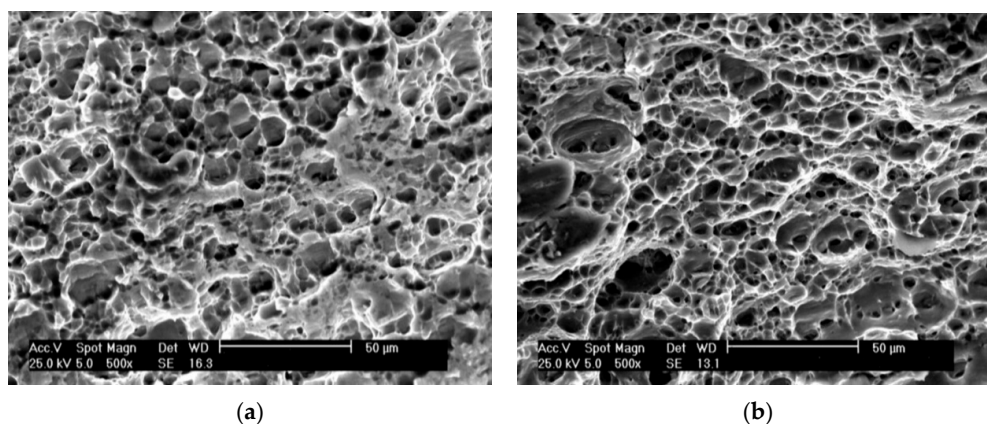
SEM pictures from fracture surfaces of (a) FS- and (b) FSV-welded specimens.
